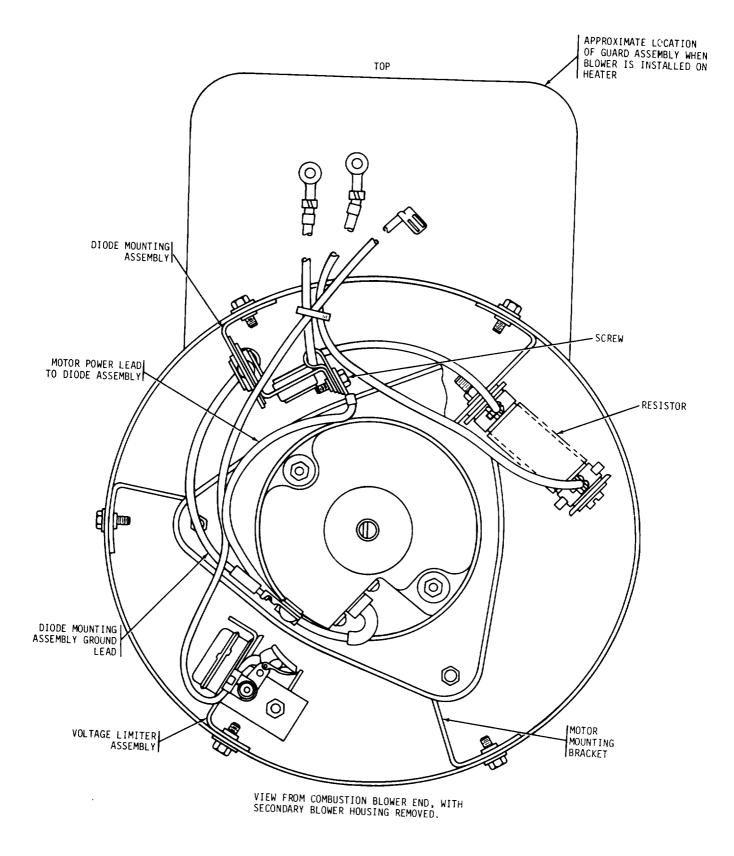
Diode assembly, voltage limiter, and resistor installation.
